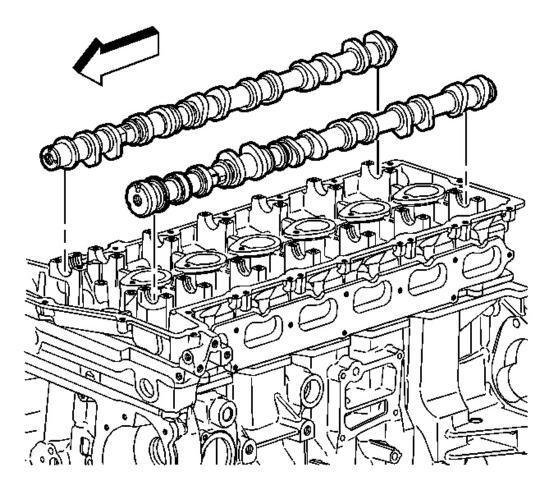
Removing/Installing Camshafts Courtesy of GENERAL MOTORS CORP.
